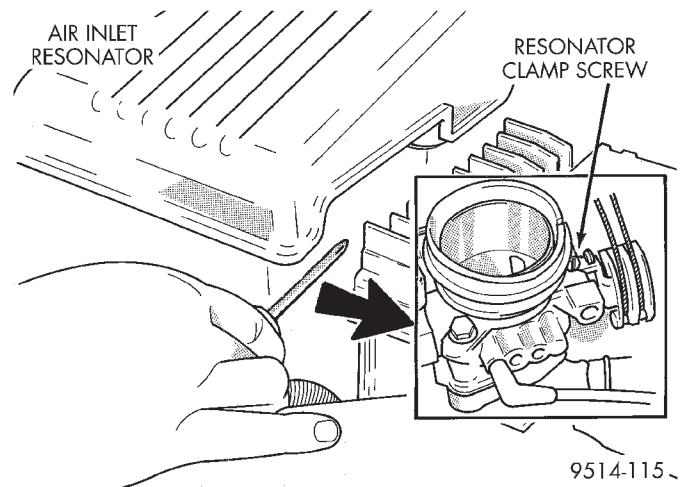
Air Inlet Resonator Attachment to Throttle Body
